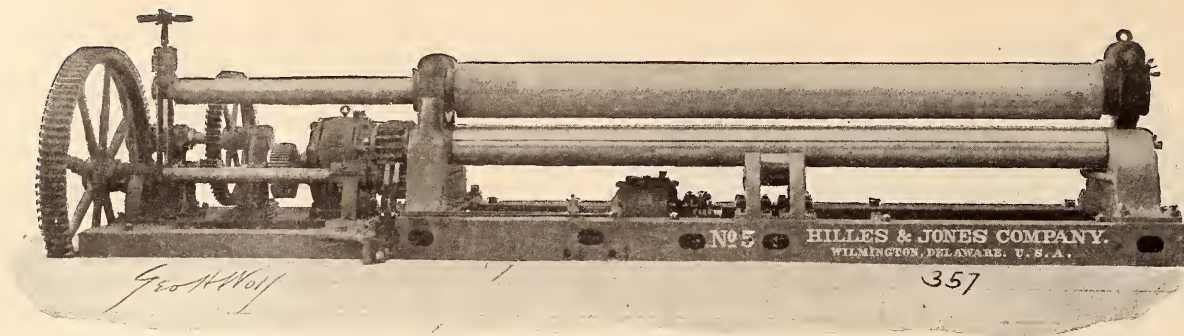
ELECTRIC MOTOR DRIVEN ROLLS MANUFACTURED BY HILLES & JONES CO.—TOP ROLL OPERATED BY INDIVIDUAL MOTOR.
